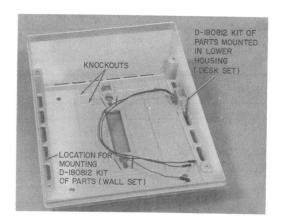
Lower Housing Removed Showing Knockouts for Access by Adjunct Cords and Locations for Mounting D-180812 Kit of Parts
